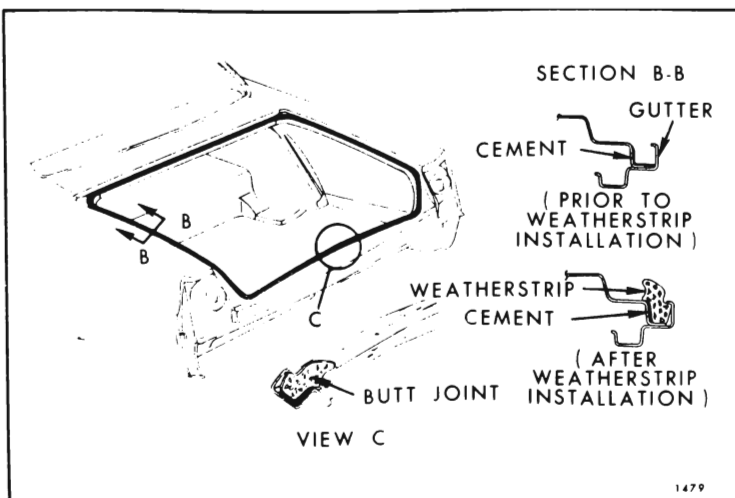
Rear Compartment Weatherstrip Assembly
